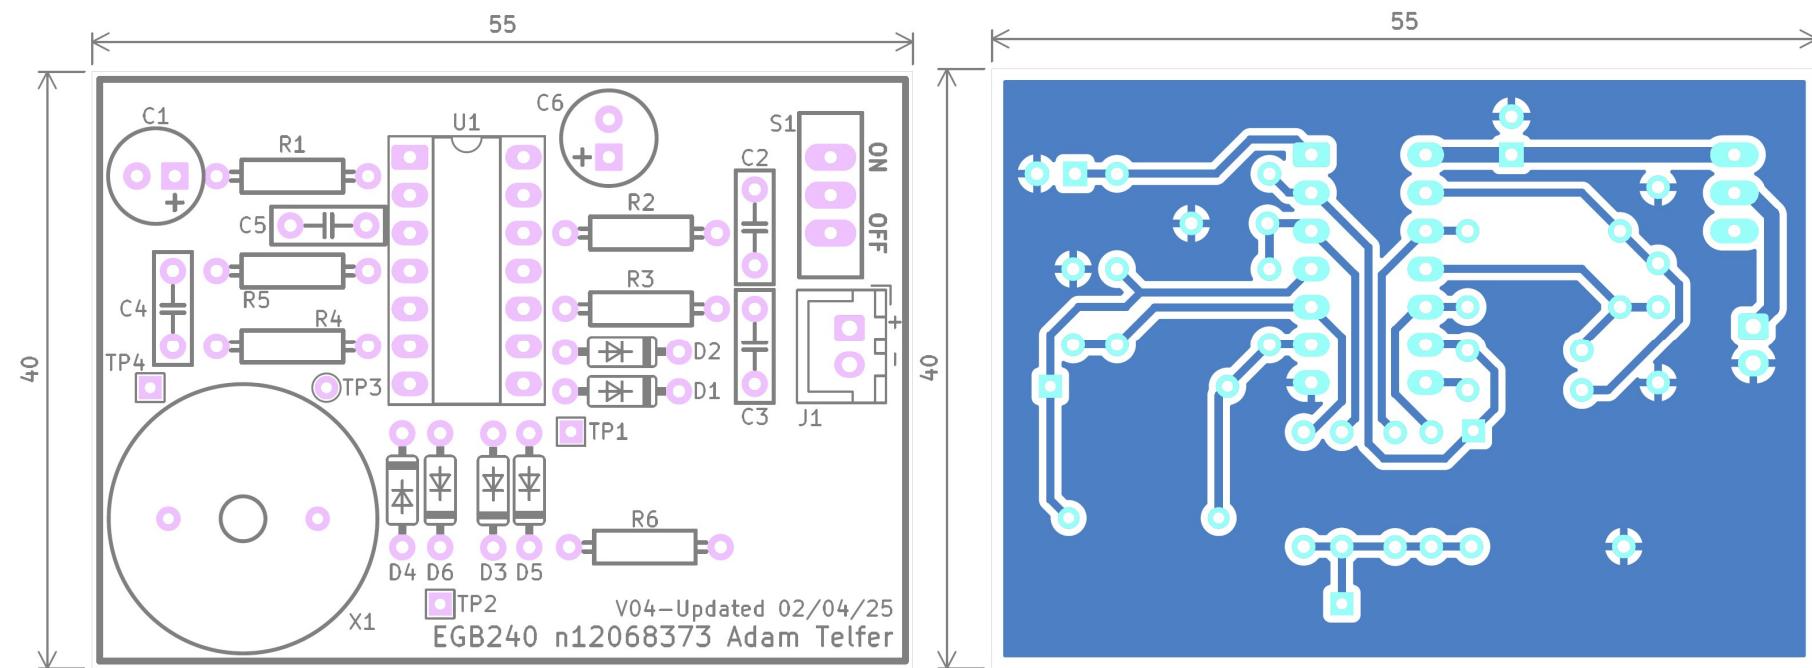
PCB front (left) and back (right) layout. Front is component side; back is copper side. Overall dimensions shown in millimetres.
